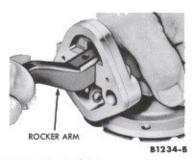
Fuel Pump Diaphragm Removal or Installation
